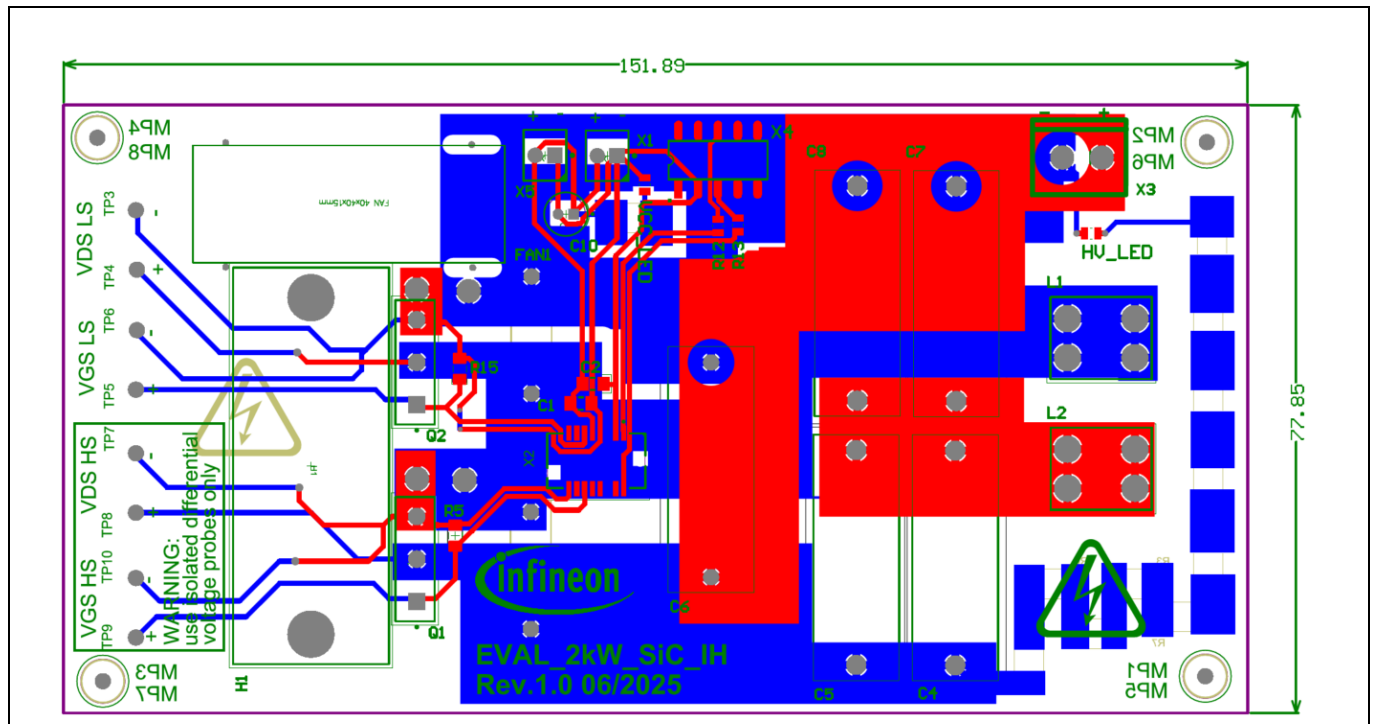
PCB layout of EVAL_2KW_SiC_IH
